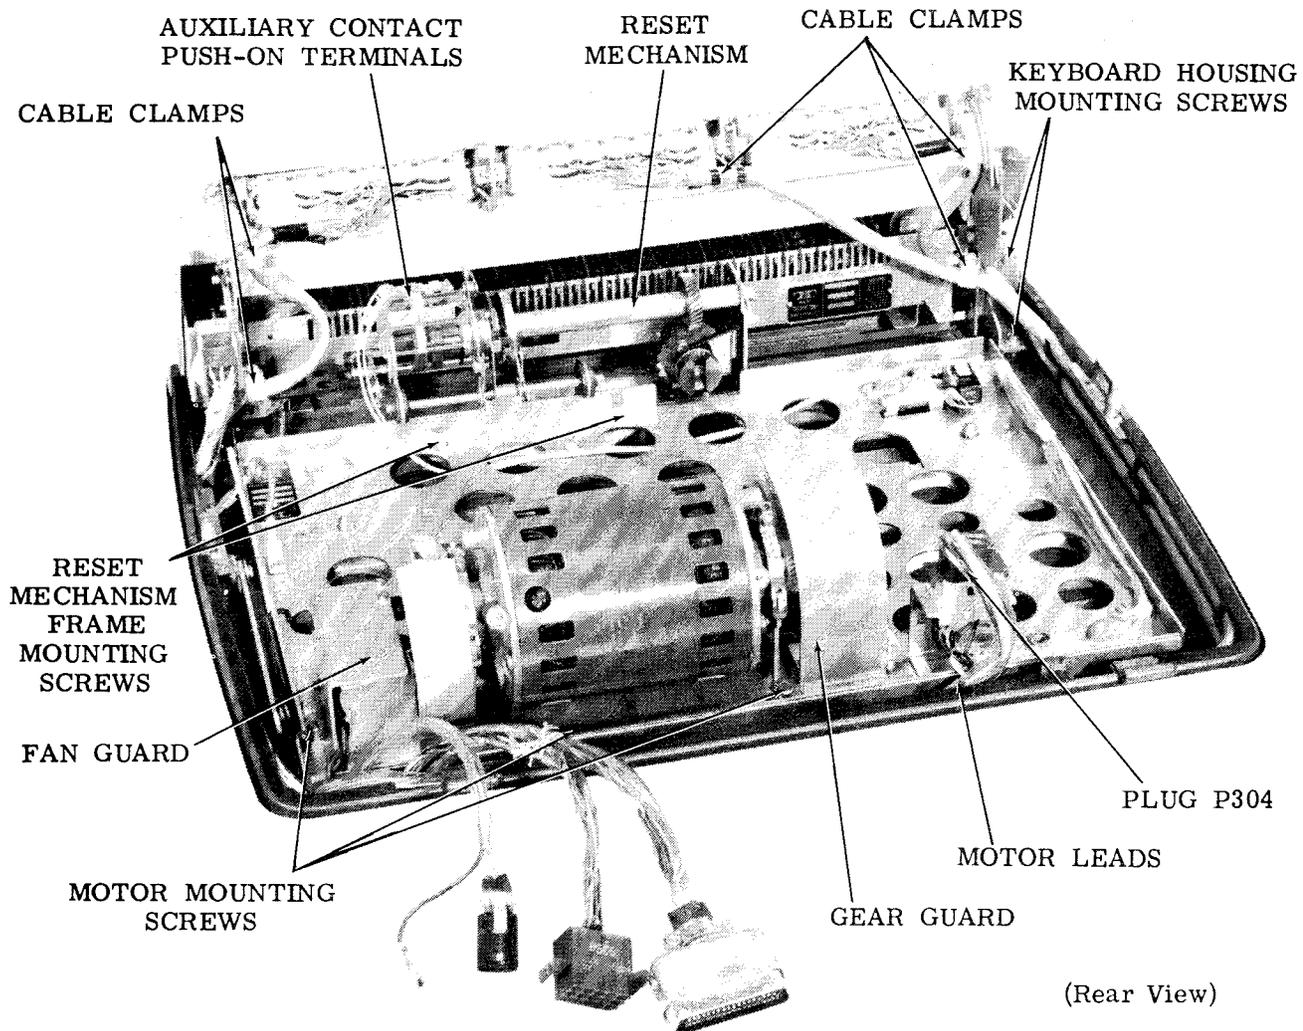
Keyboard, Control Panel, Reset Mechanism, and Motor Unit
